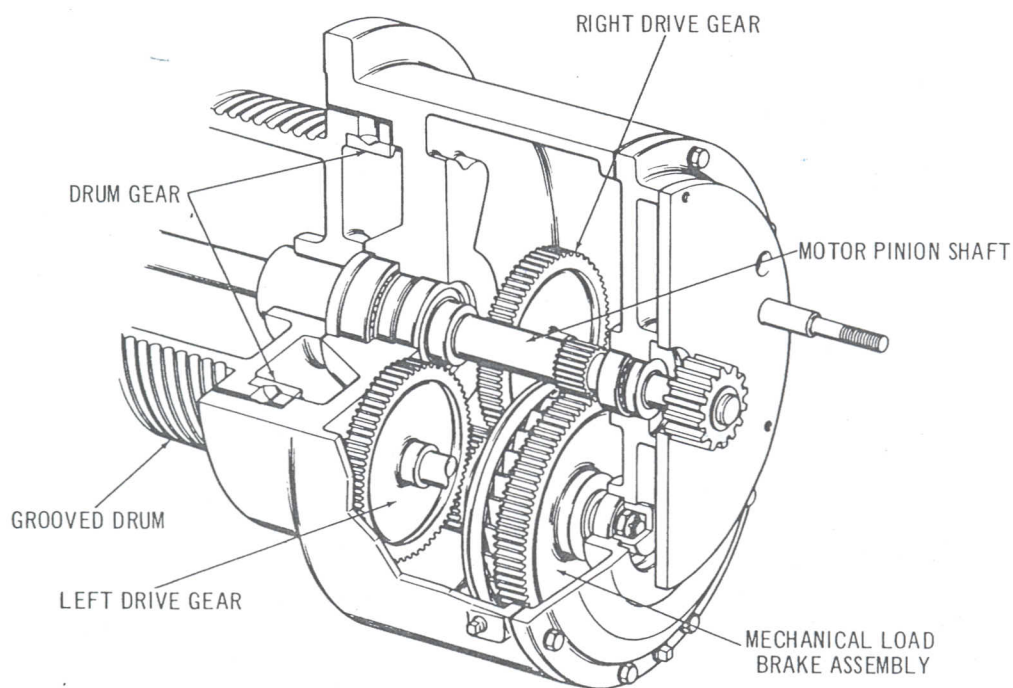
Balanced Design Hevi-Lift Hoist Drive
